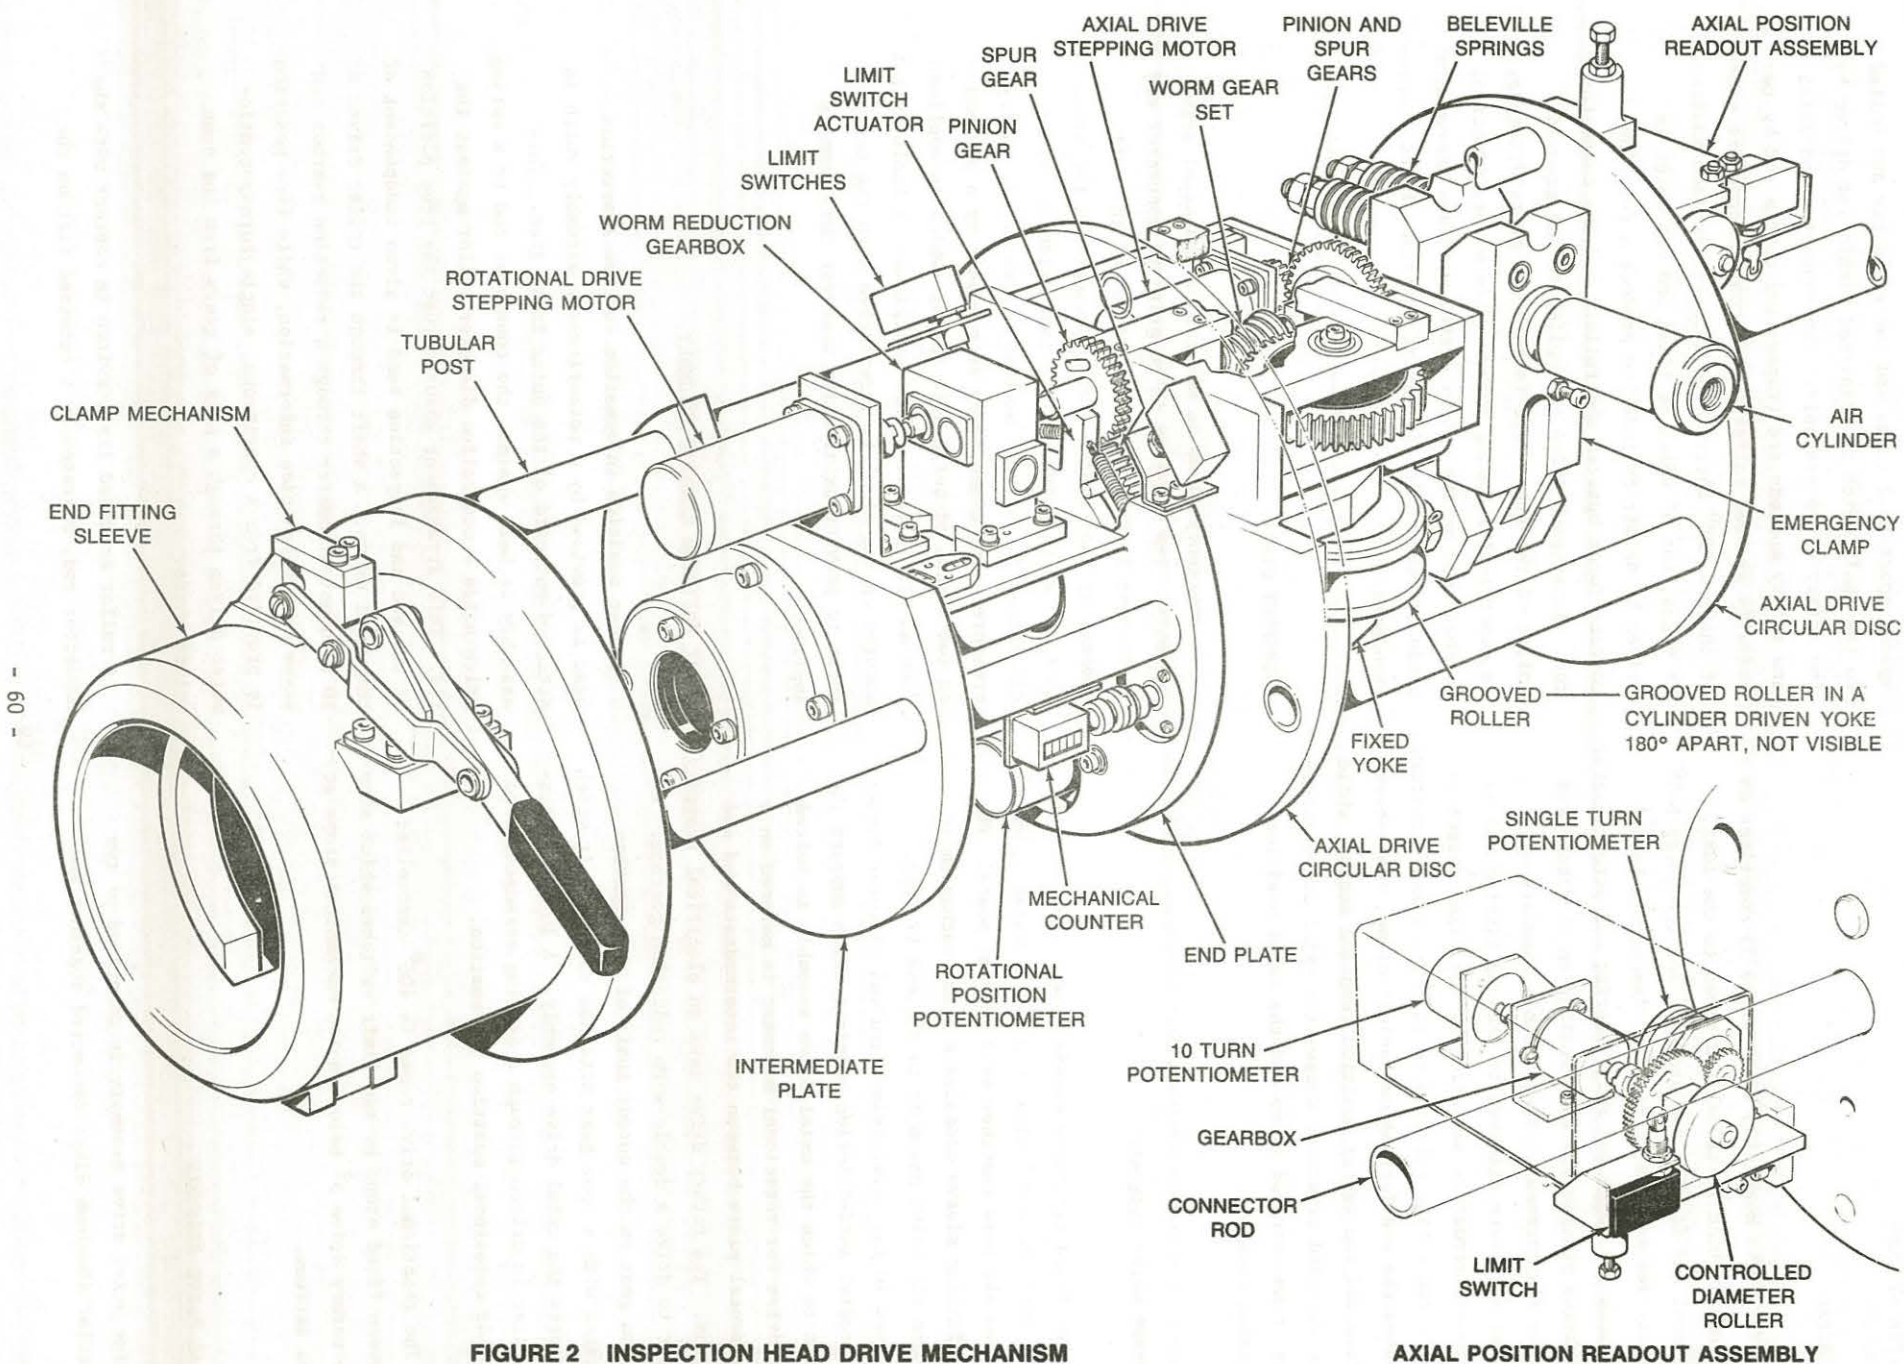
INSPECTION HEAD DRIVE MECHANISM
